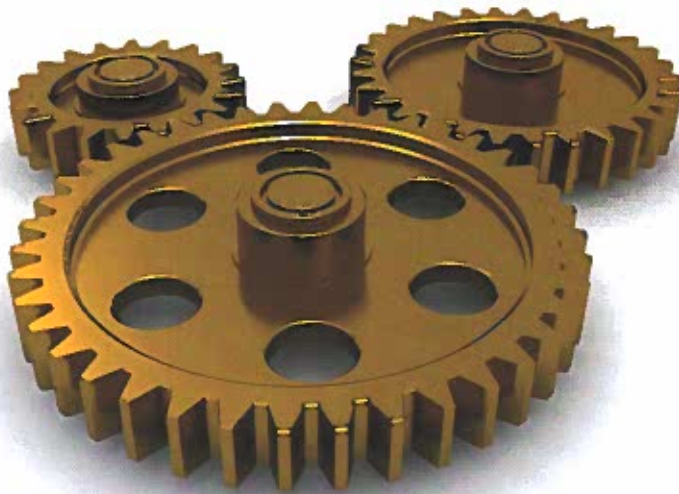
On spur gears, the teeth are cut straight across the width of the gears.
